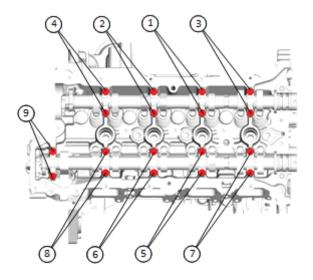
Front Camshaft Bearing Cap Courtesy of GENERAL MOTORS COMPANY
